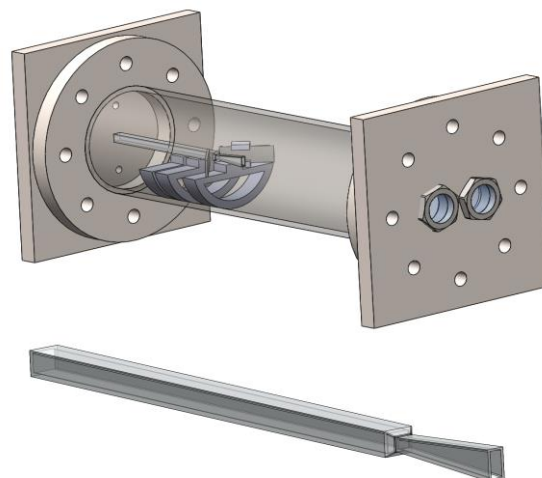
Test Section and Surrounding Components with Visible Sight Windows
